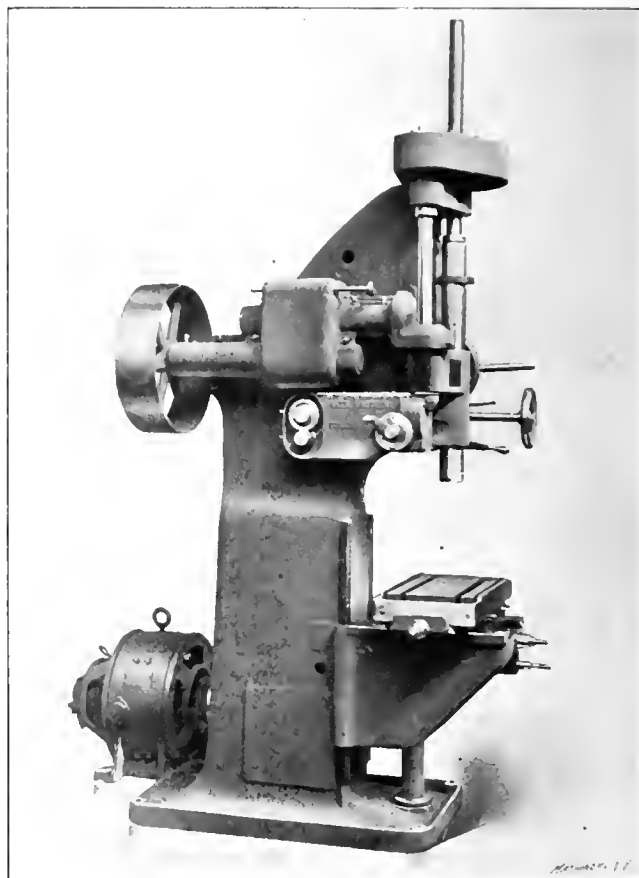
Baker Brothers High-speed Drilling Machine on which Tests were made
